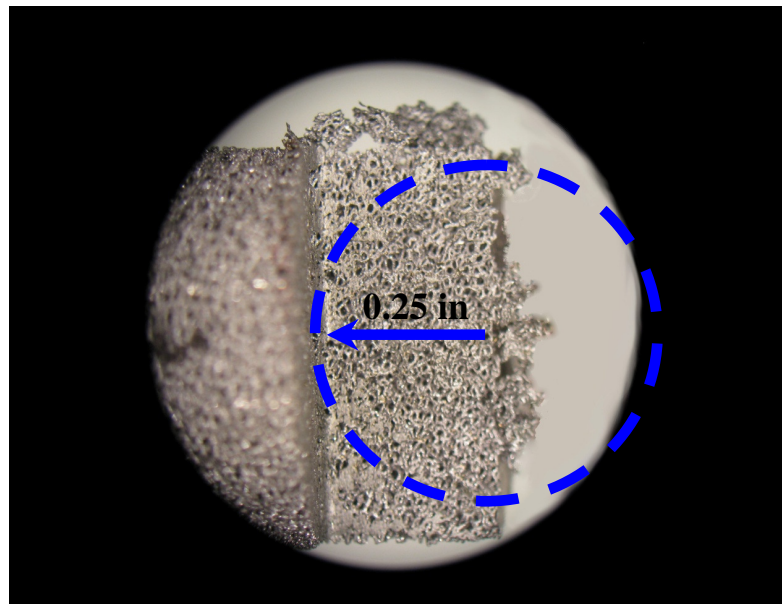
Tool cutting position for an example cut (magnification at 25x), the dashed line represents the tool diameter
